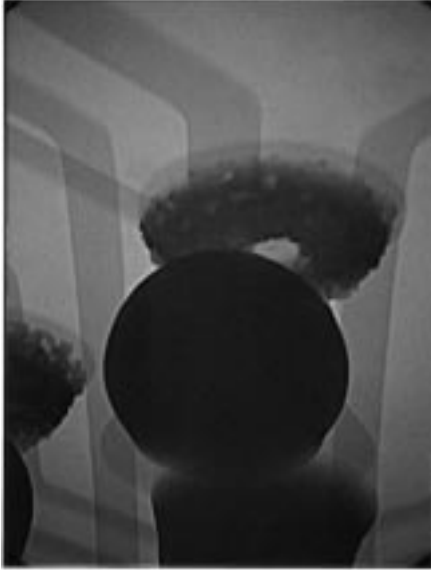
Example of defective connection in a BGA solder ball (photographed using Marubun Corporation EV-160 ml)
